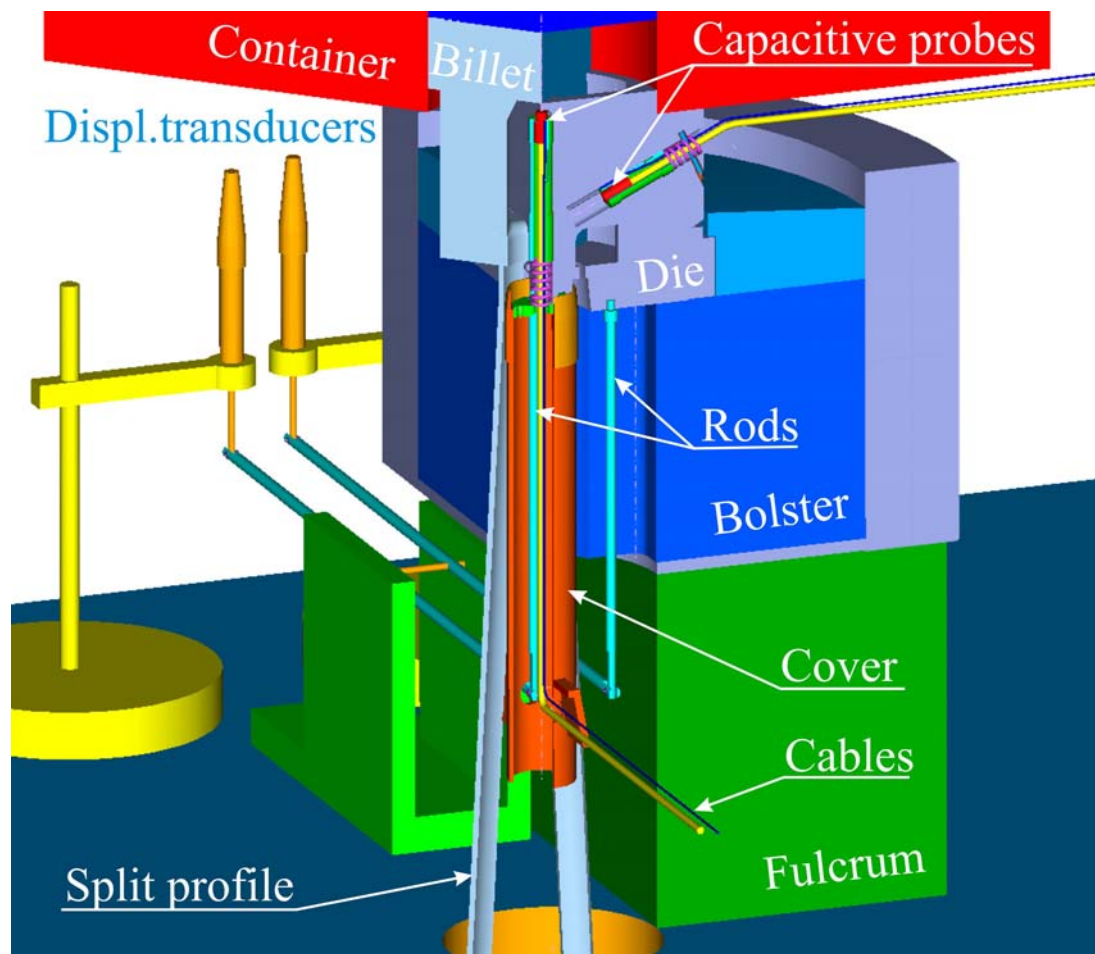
The experimental set-up for split pipe extrusion. Only a quarter of the tool stack, profile and billet is shown.
